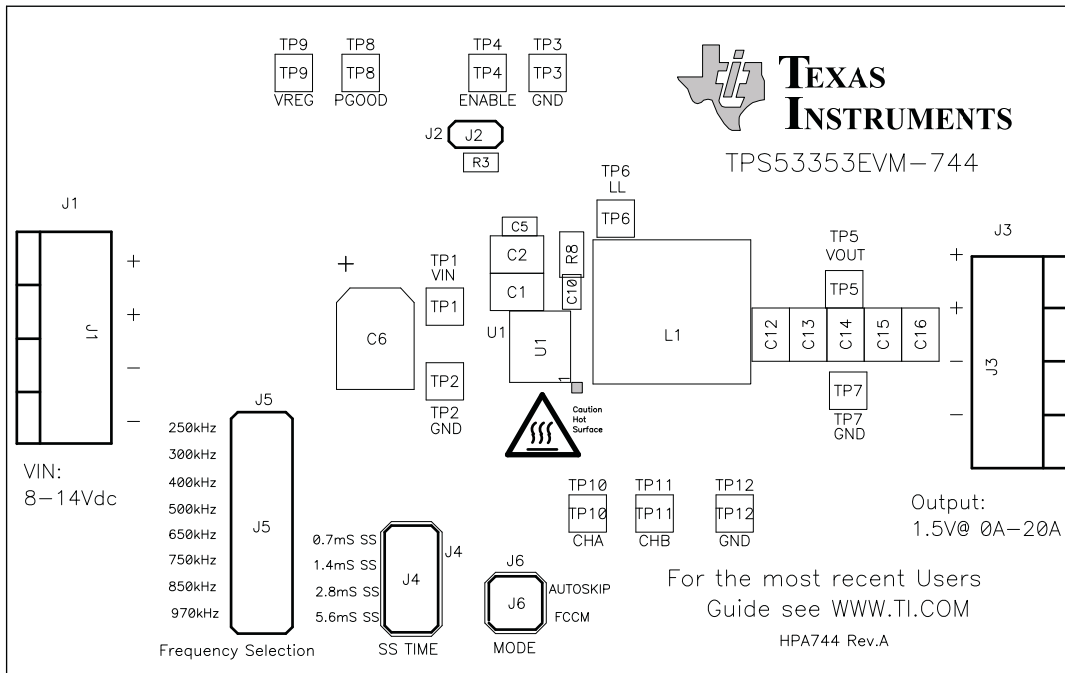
TPS53353EVM-744 Top Layer Assembly Drawing
